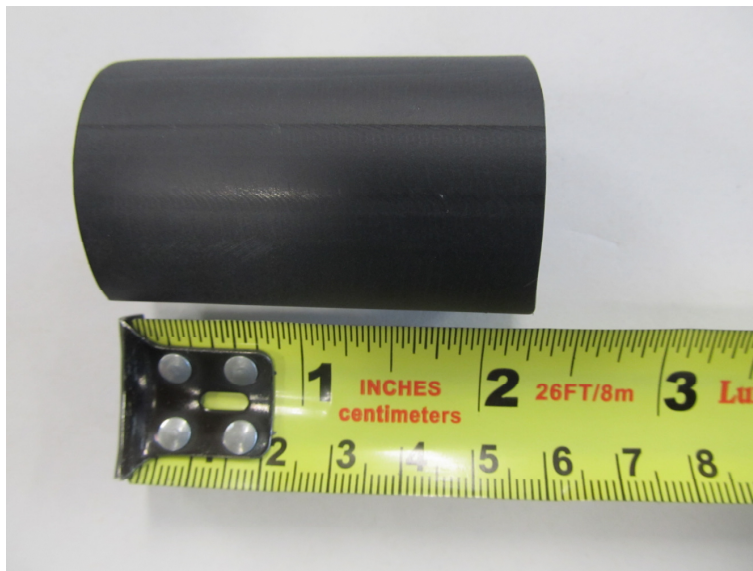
Cut heat shrinking tube to 2 ¼ inches
